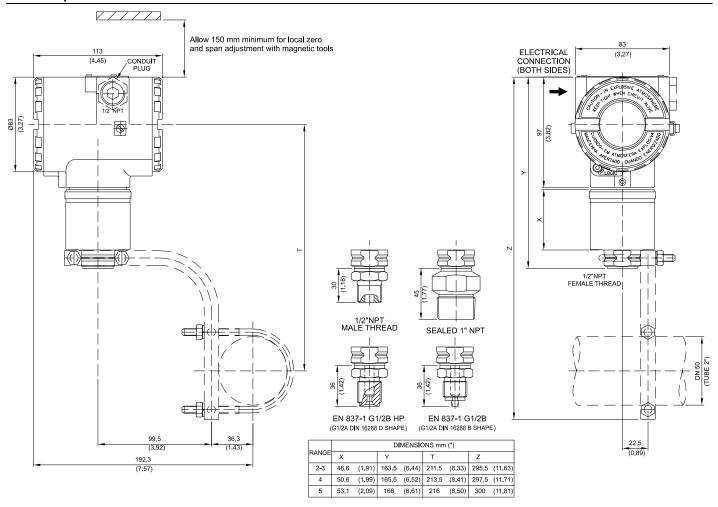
(a) – Dimensional Drawing and Mounting Position for LD291
